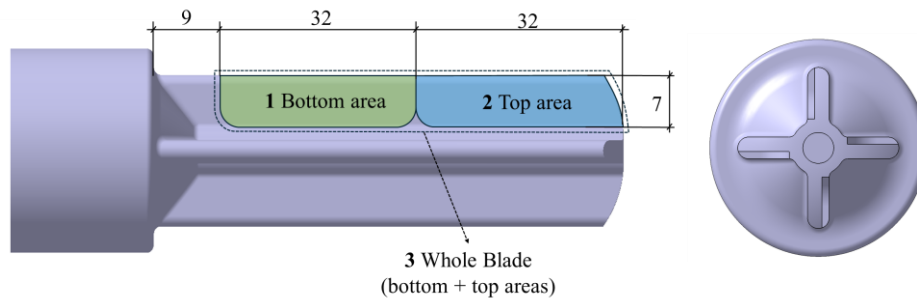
Dimensions (in mm) and geometry of the three areas of milling operation performed on the specimens
